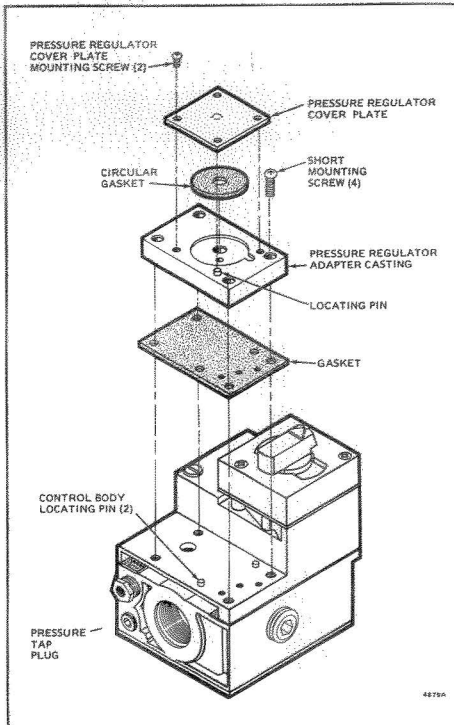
Use short mounting screws when mounting operator-regulator cover plate on V800 standard capacity control.
